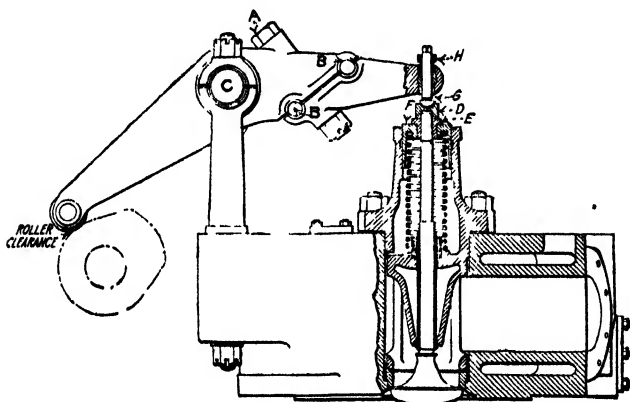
Busch-Sulzer Type B exhaust valve and rocker.
